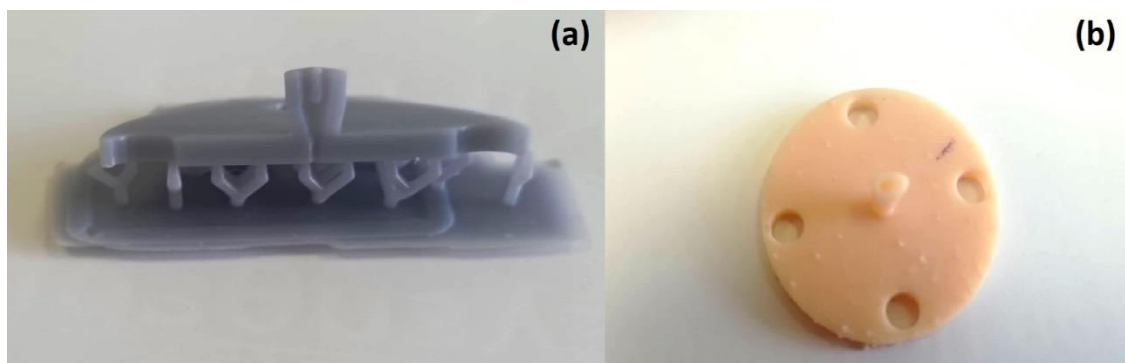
(a) SLA 3D printing using supportive material under an angle. After removing the supporting material the bottom base surface of the part was rough. (b) SLA 3d printing using supportive material inverting the part. The bottom base surface remains smooth.
